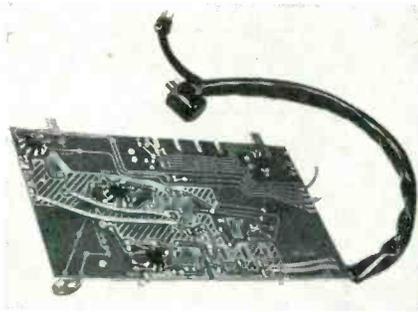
Printed board used in tape recorders. Single sided wiring requires jumper wire.
